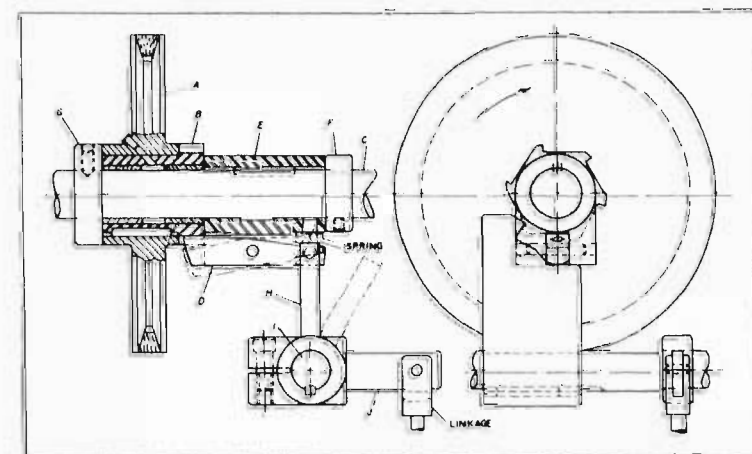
One-revolution clutch which incorporates a cog wheel and pawl.
